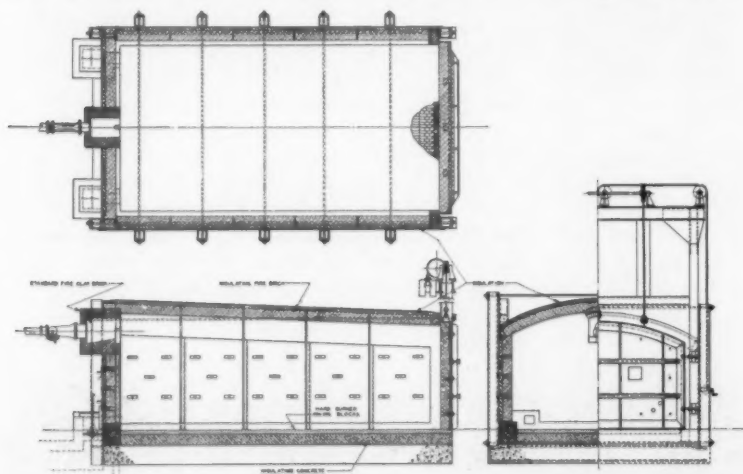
TYPICAL DESIGN FOR A MODERN, INSULATED, FLOOR-TYPE OVEN.
